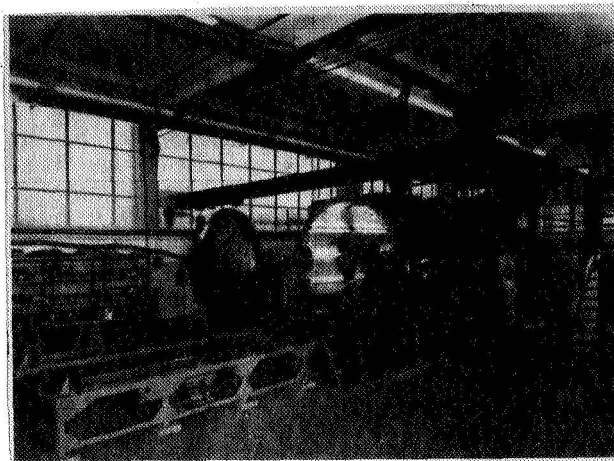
Vacuum Tank of an Electron-Beam Welding Unit
